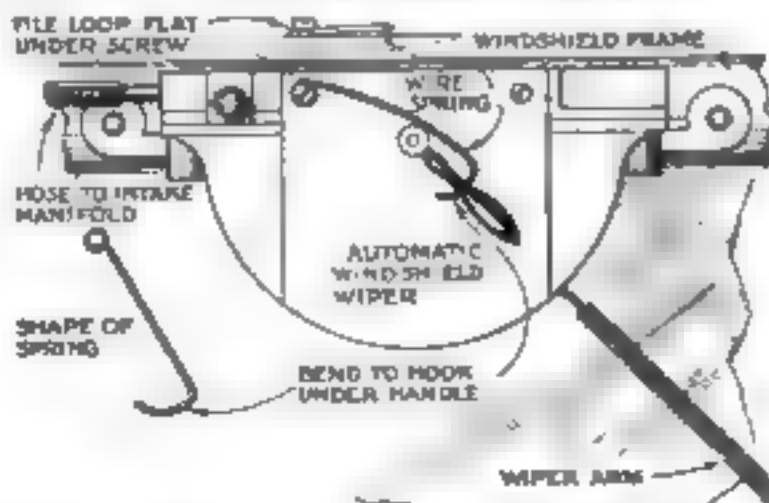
The wiper on any of the vacuum types of automobile windshield wipers can be kept out of the way with a piece of spring wire bent as shown.
